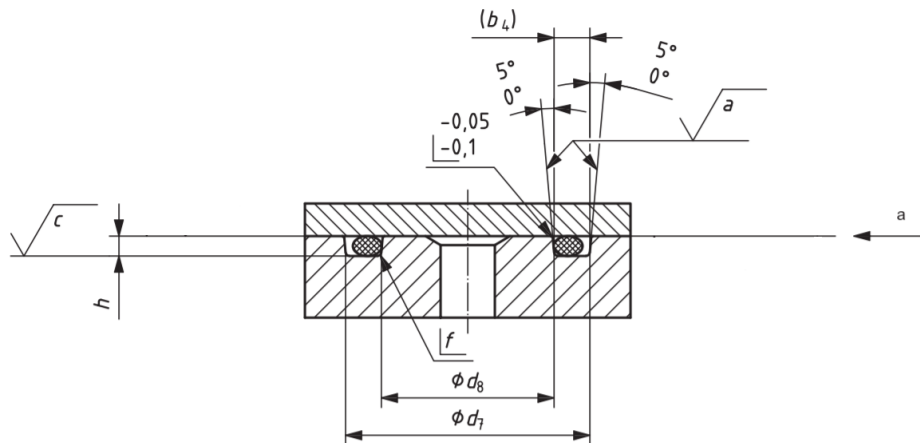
Illustration of housing for face seal with external pressure [28].
